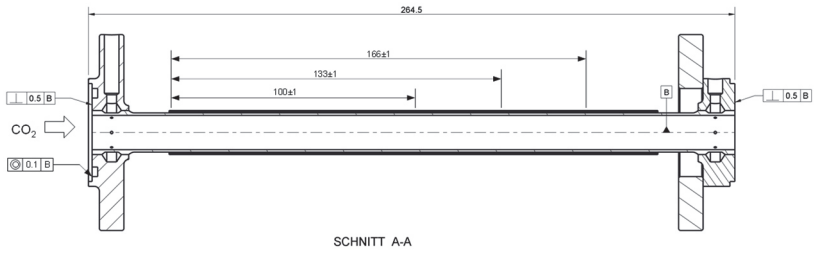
Pressure tap soldered to test tube made of stainless steel. Overall tolerance: ISO 2768-f.
